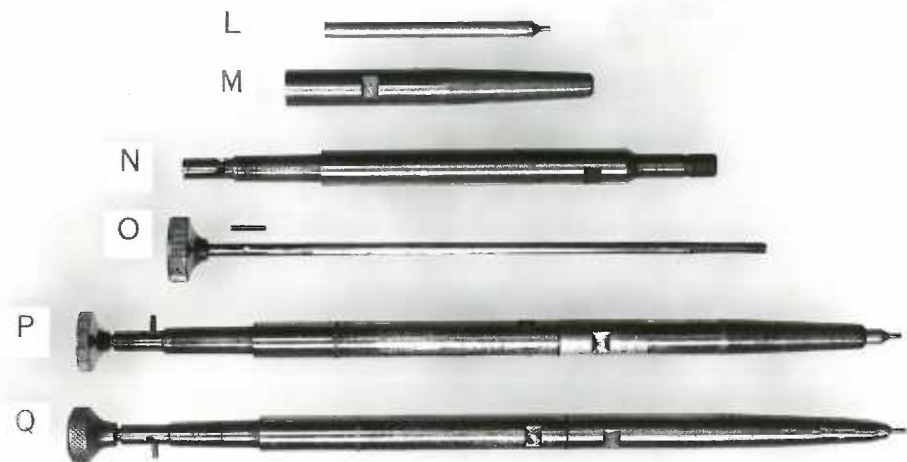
Flow sheet photo of adaptation of the handpiece parts of the implanter.
